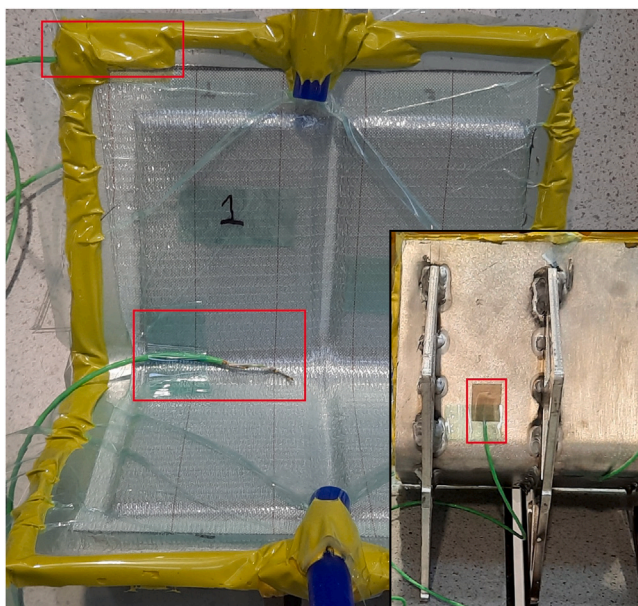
Thermocouple setup: Two thermocouples were placed on the underside of the tool near the corner (bottom right, one in each flange), one thermocouple was placed in the bag under the sealant tape (top left) and another one was placed on top of the vacuum bag at the L-shape corner to measure air temperature at this location.
